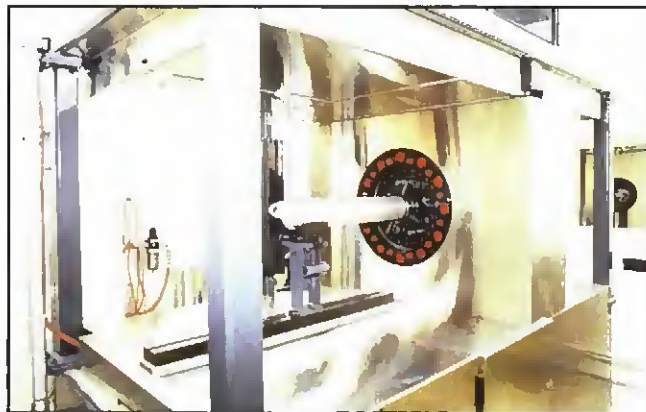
Experimental magnetic pulse welding machine at Dana Corp.'s research laboratory in Toledo, Ohio, has been used to demonstrate the ability to weld aluminum driveshafts. A second production unit is on order from the equipment builder, Manufacturing Technology, Inc.
